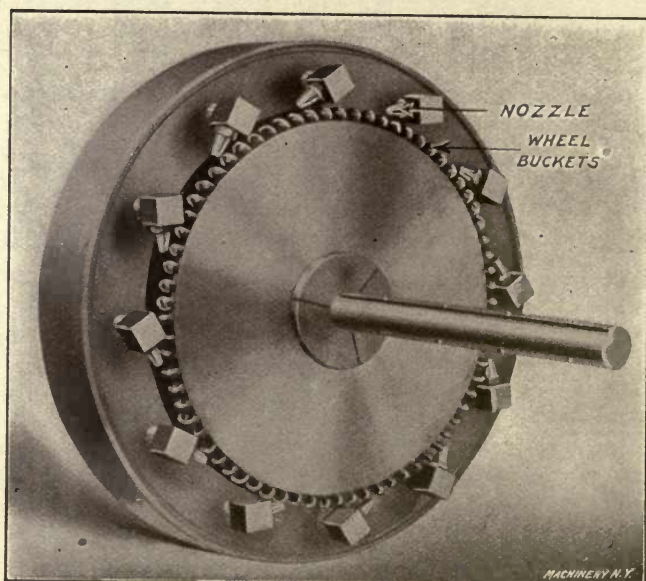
Wheel and Nozzles of the Kerr Turbine
